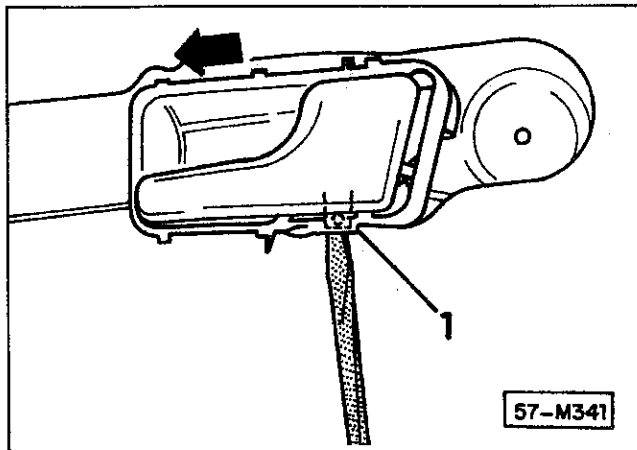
Remove door release housing by releasing locking tab (1) and sliding housing forward (arrow). If necessary, unhook link rod from release mechanism.
